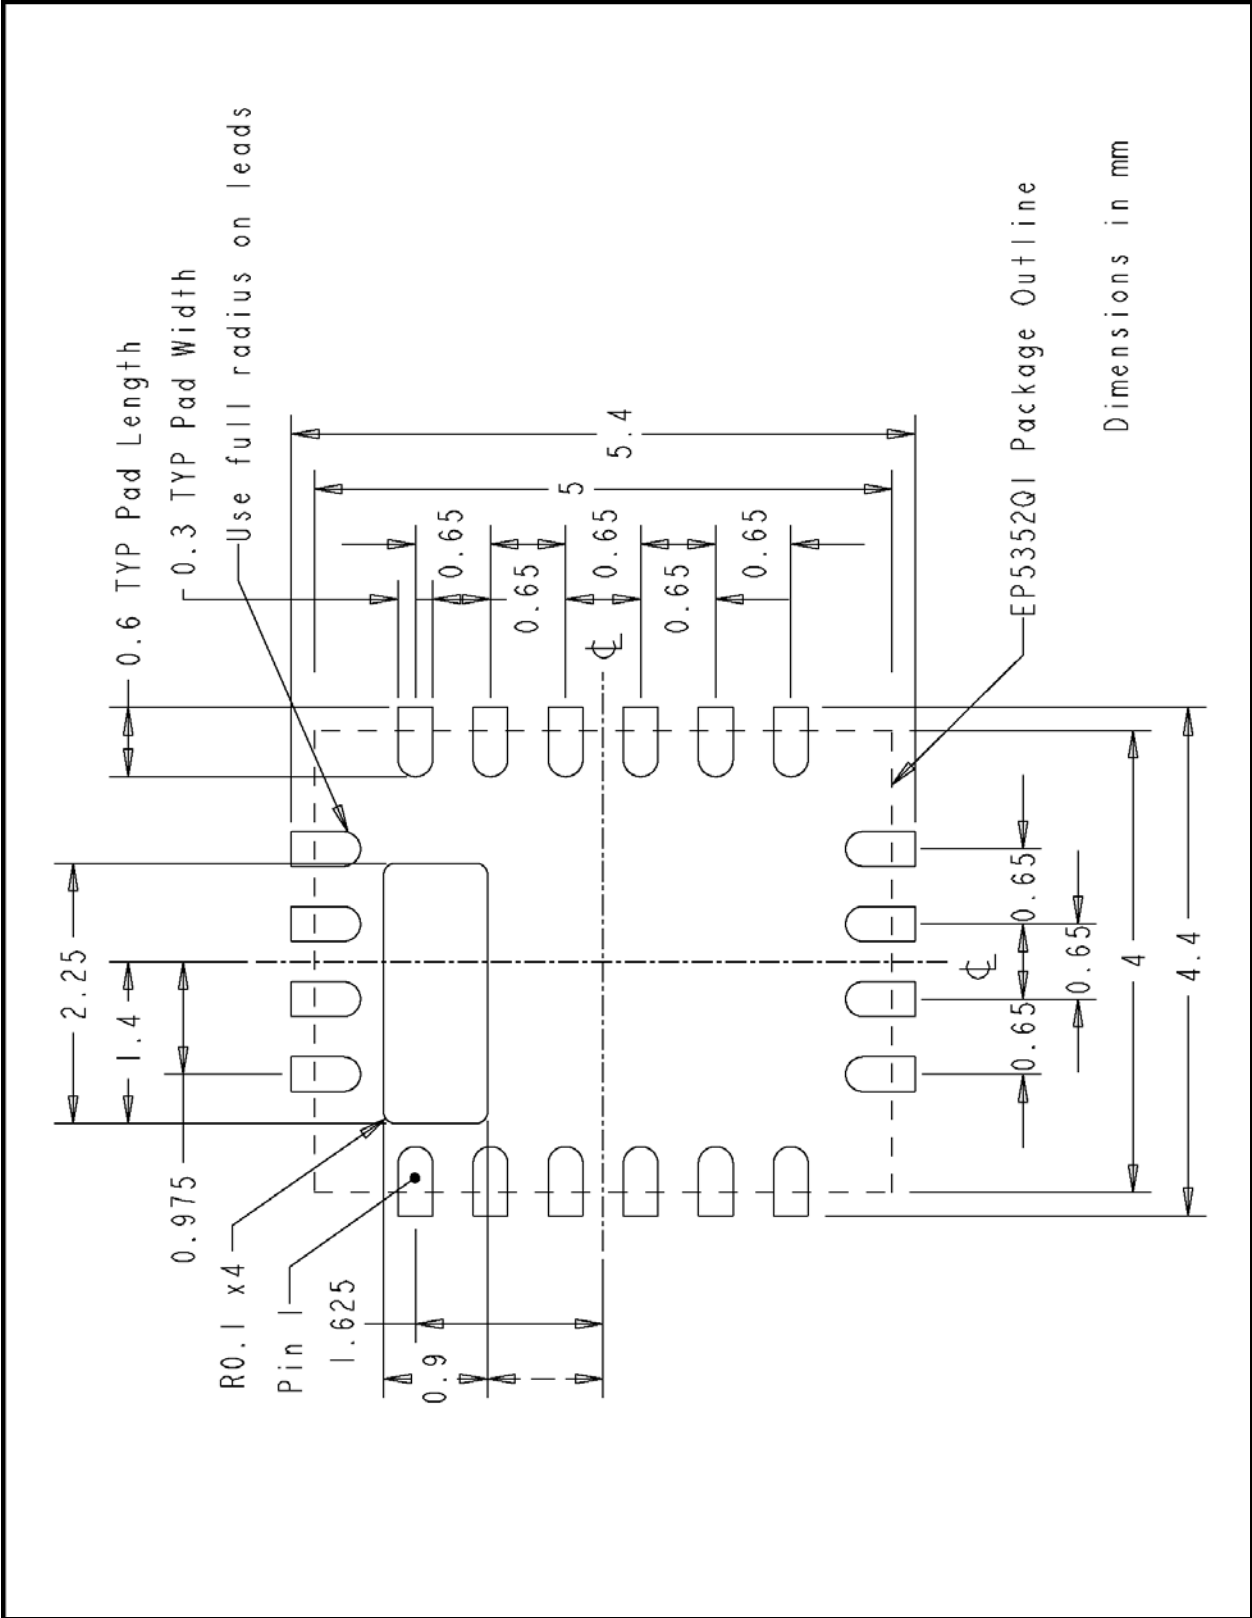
PCB Land Pattern for soldering EP5352QI QFN package
